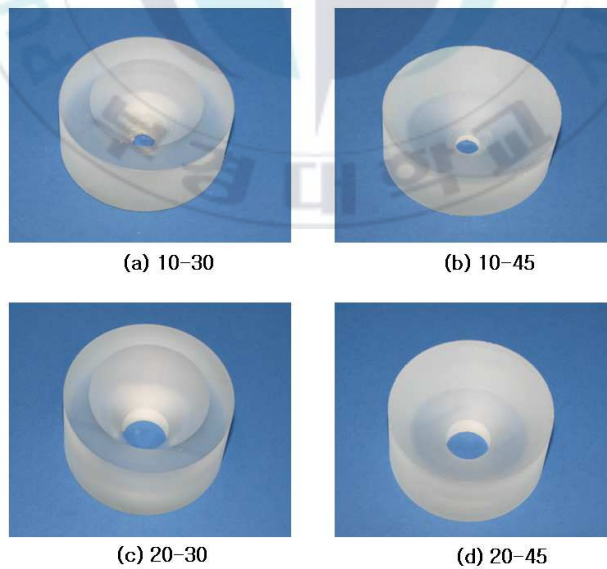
Extrusion Die(diameter of outlet-angle of die).
